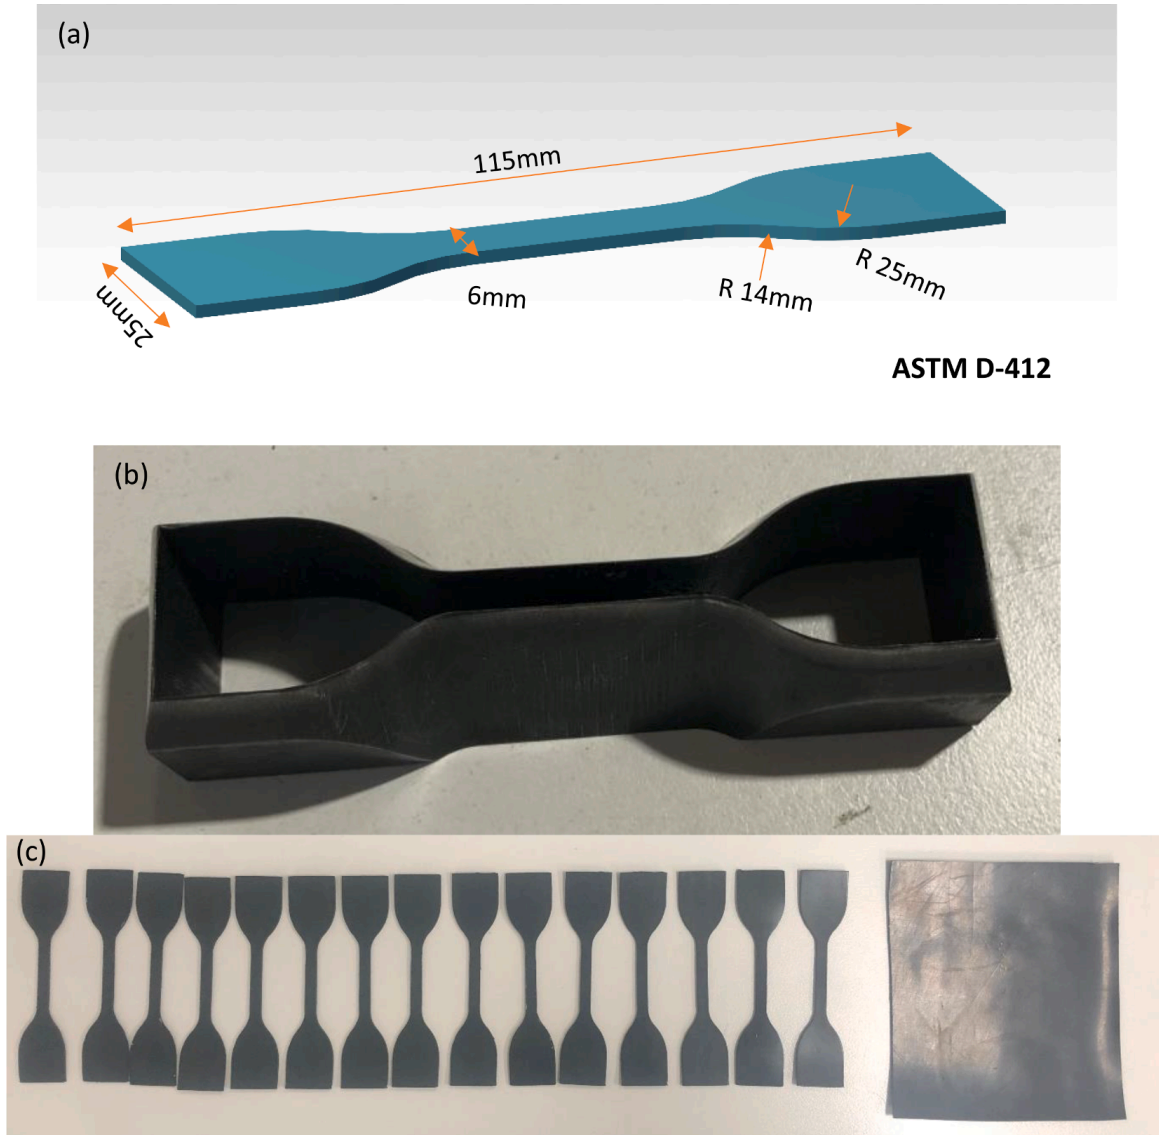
(a) Dimensions, (b) mould and (c) specimen dumbbell samples for material testing of EPDM rubber following the ASTM D-412 standard.
